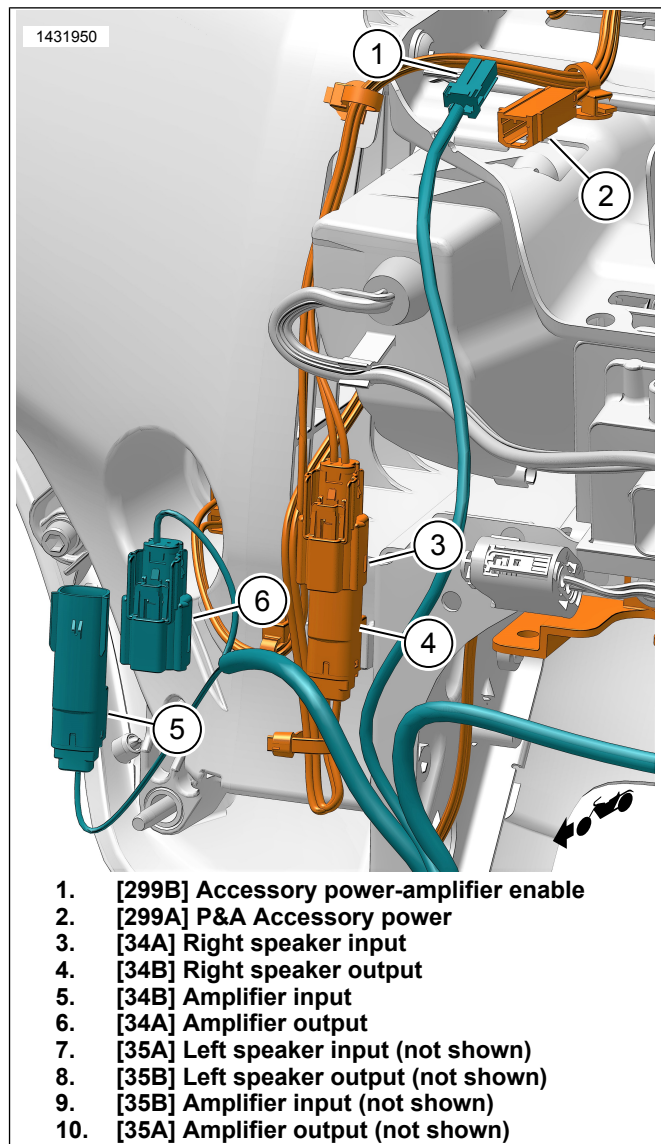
Fork Mounted Speaker Harness (Right Side Shown, Left Similar)
